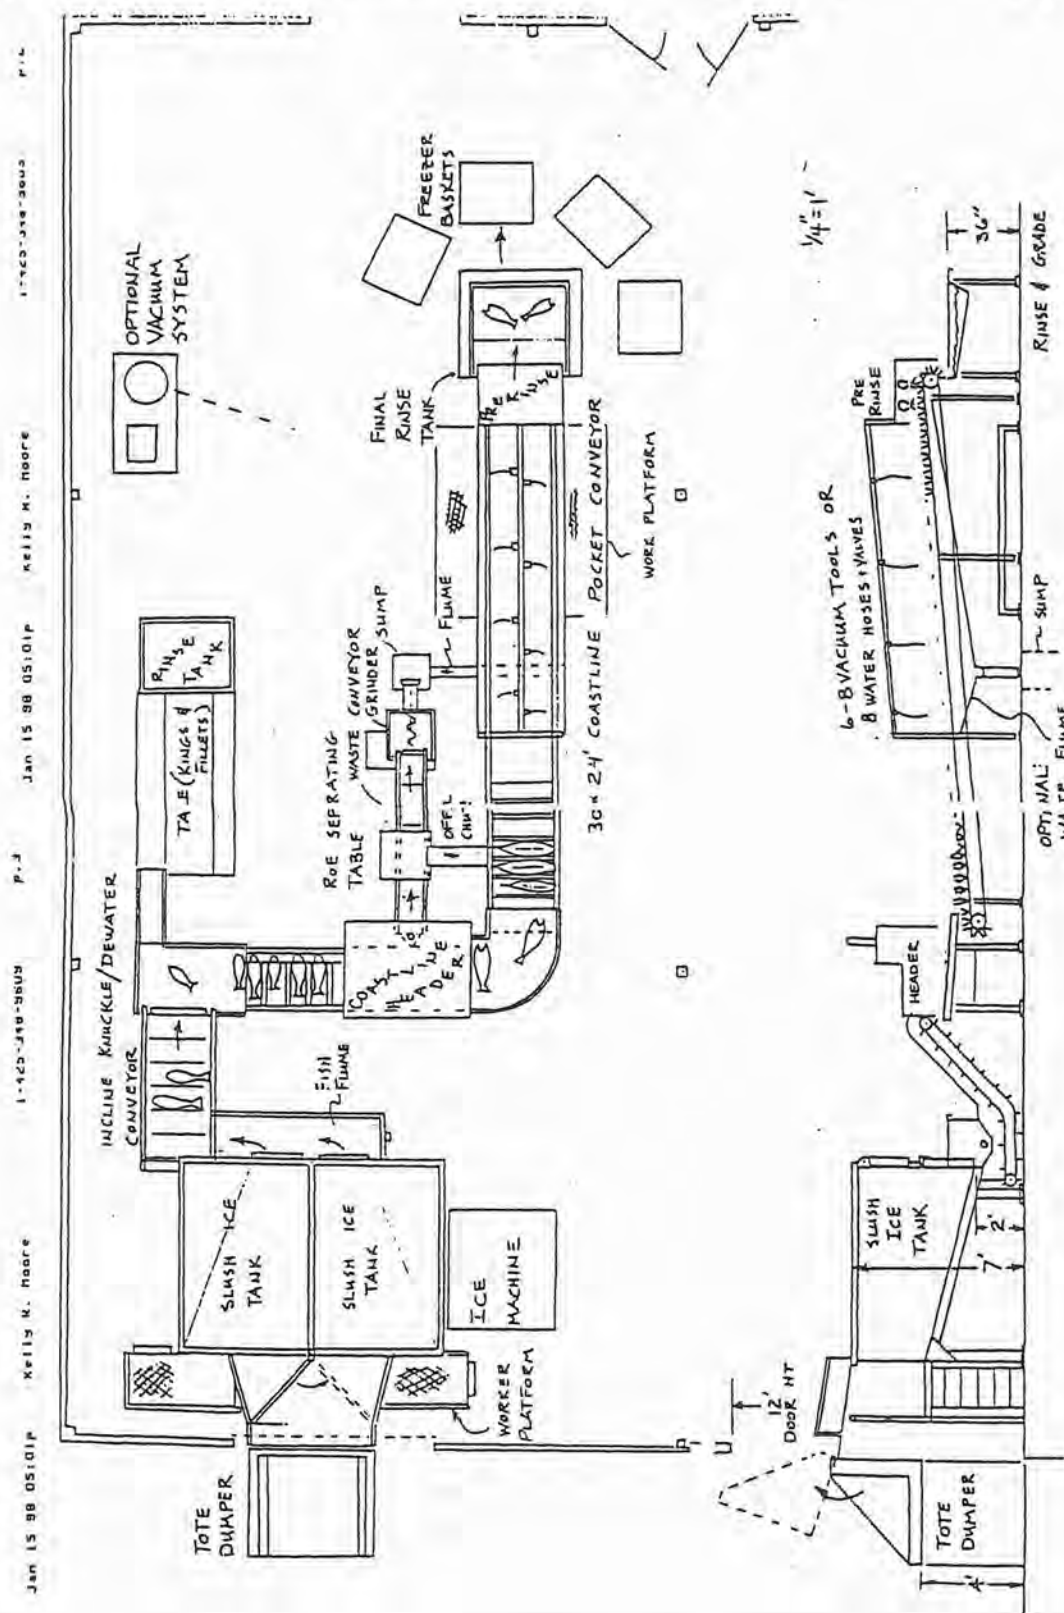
Design of a Small Scale Head and Gut Processing Line By Fluor Metal Fabricators
